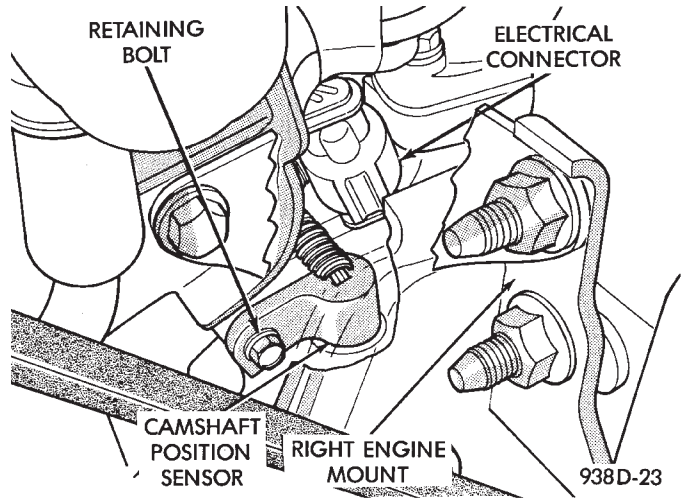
Camshaft Position Sensor—Turbo III Engine
